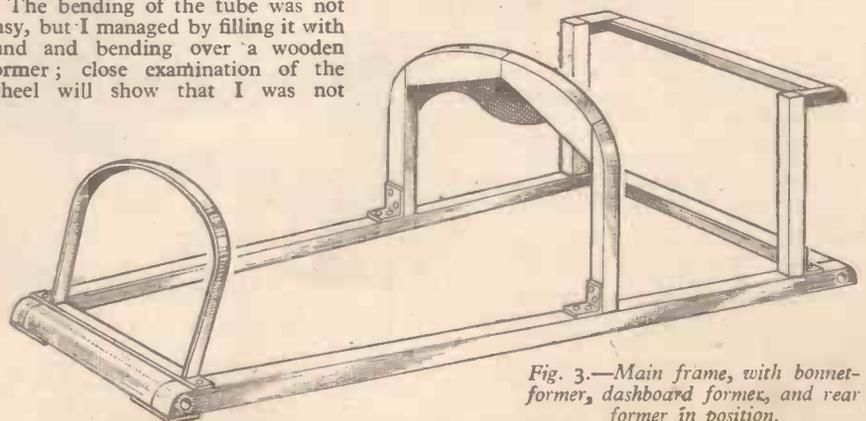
Main frame, with bonnet-former, dashboard-former, and rear-former in position.
